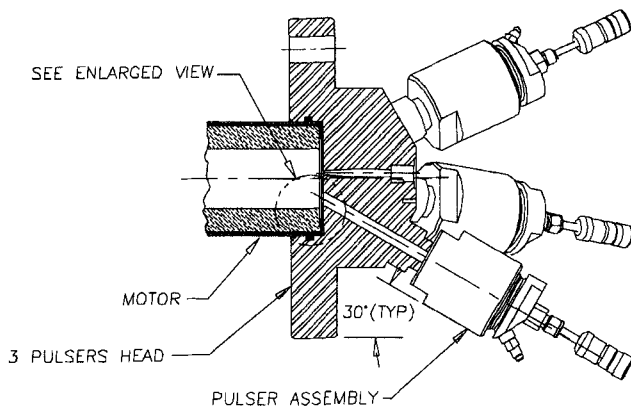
Cutaway of the motor headend showing pulsers and a pulser channel.
